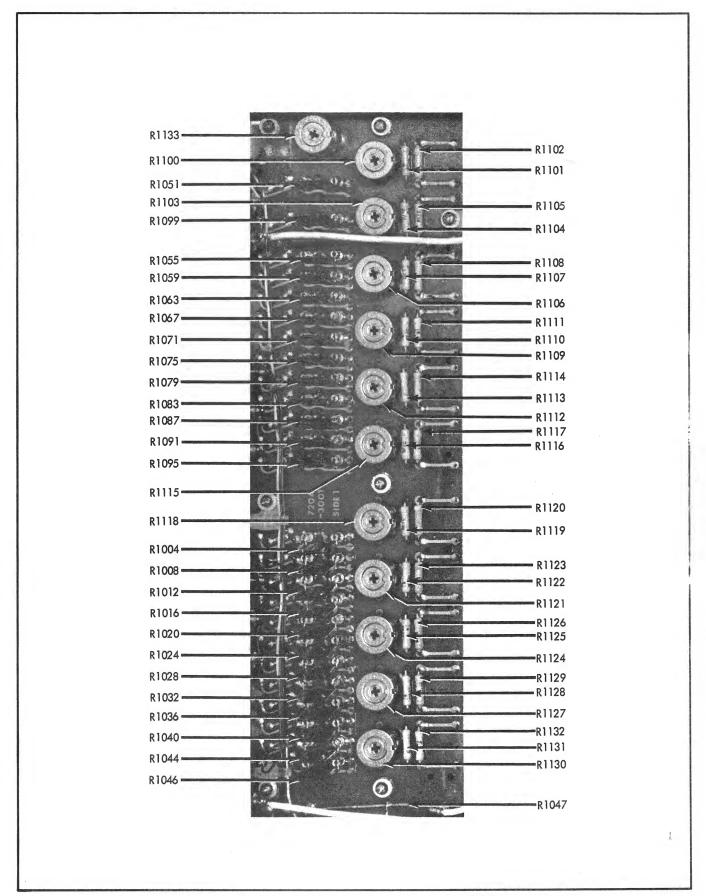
TRIMMER P/C ASSEMBLY (Sheet 1 of 2)
